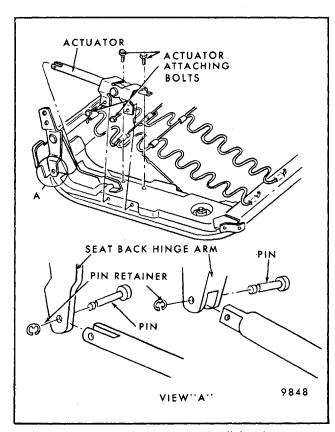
Front Seat Back Power Reclining Actuator -Cadillac Eldorado and Seville
